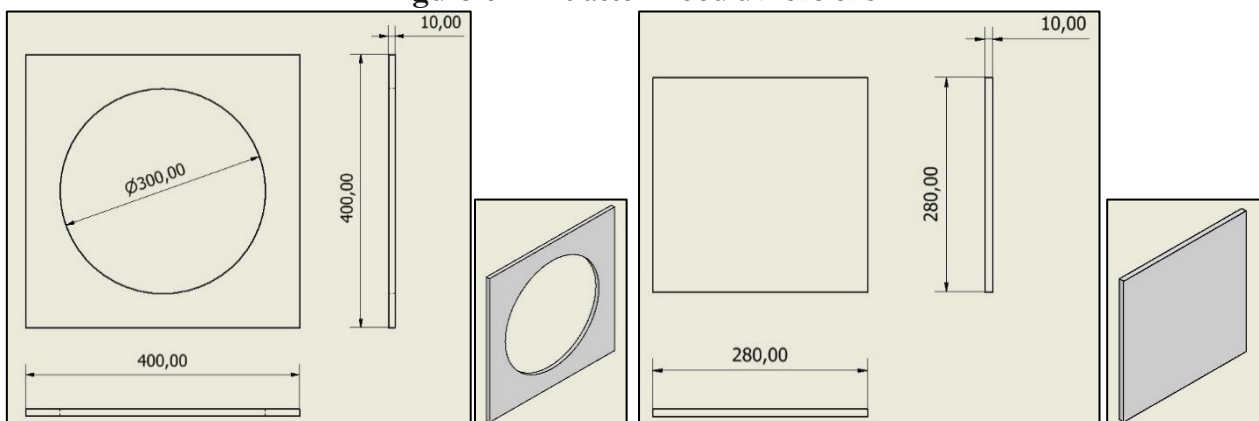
and 4 show plan and perspective views with the dimensions in millimeters of the structural parts of the wind tunnel.
